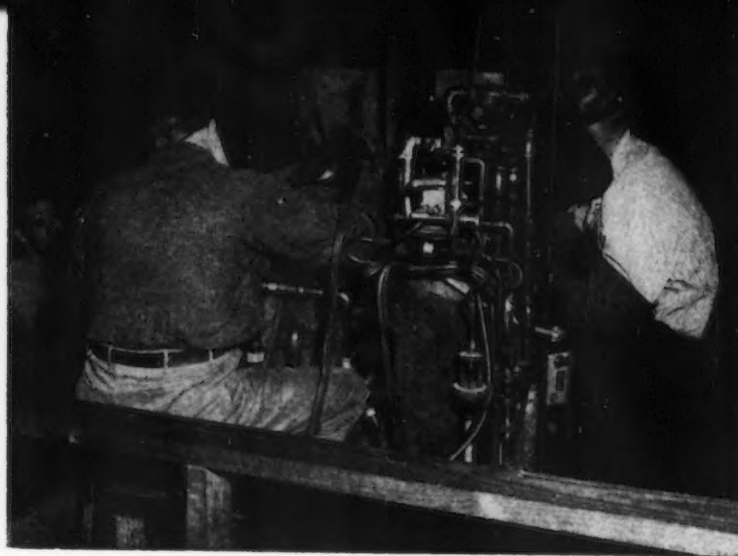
This setup is used for simultaneously making two Heliarc welds that join a pair of fender stampings while the parts are clamped in an air-operated fixture.
